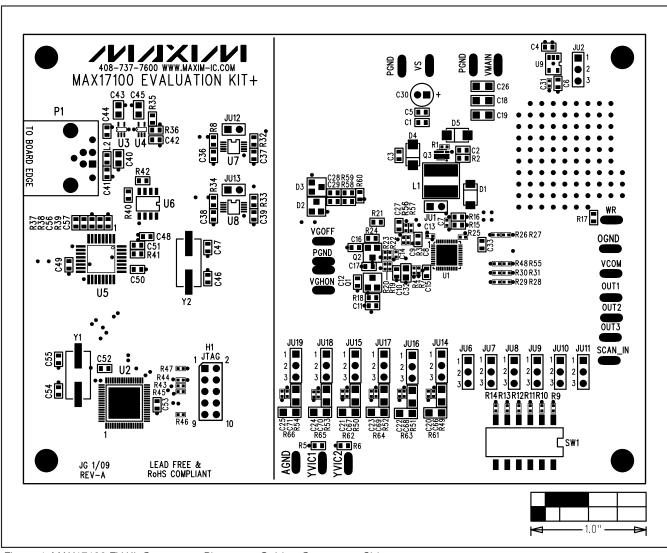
MAX17100 EV Kit Component Placement Guide—Component Side
